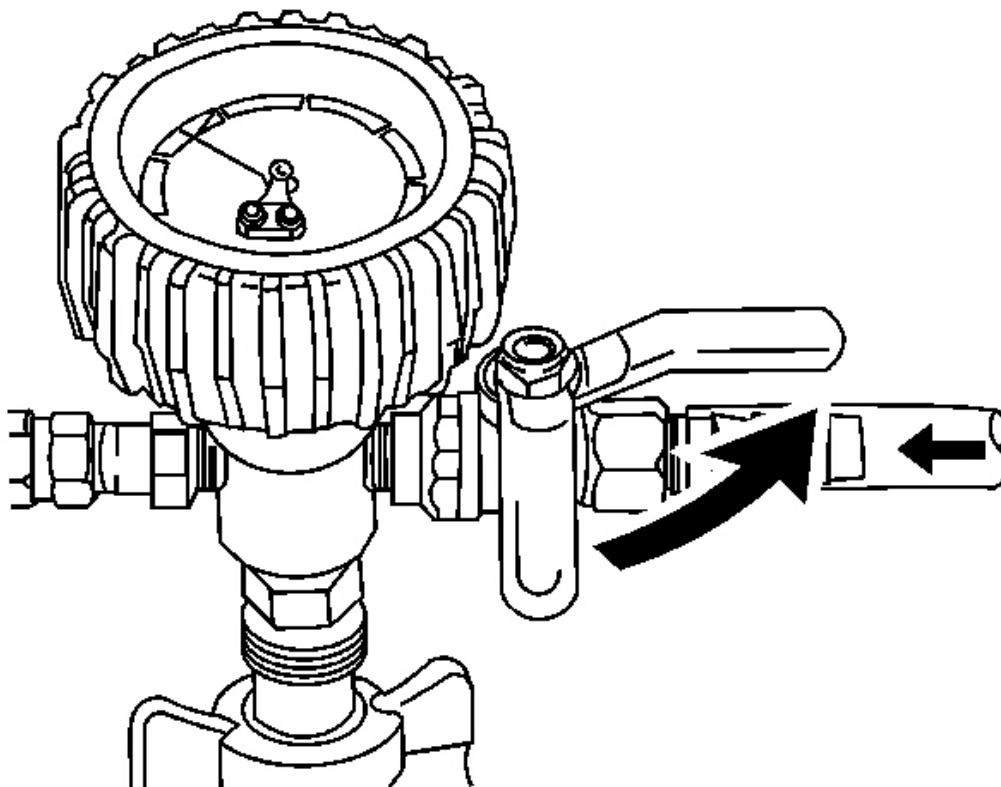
Identifying Valve On Vacuum Gage Assembly
